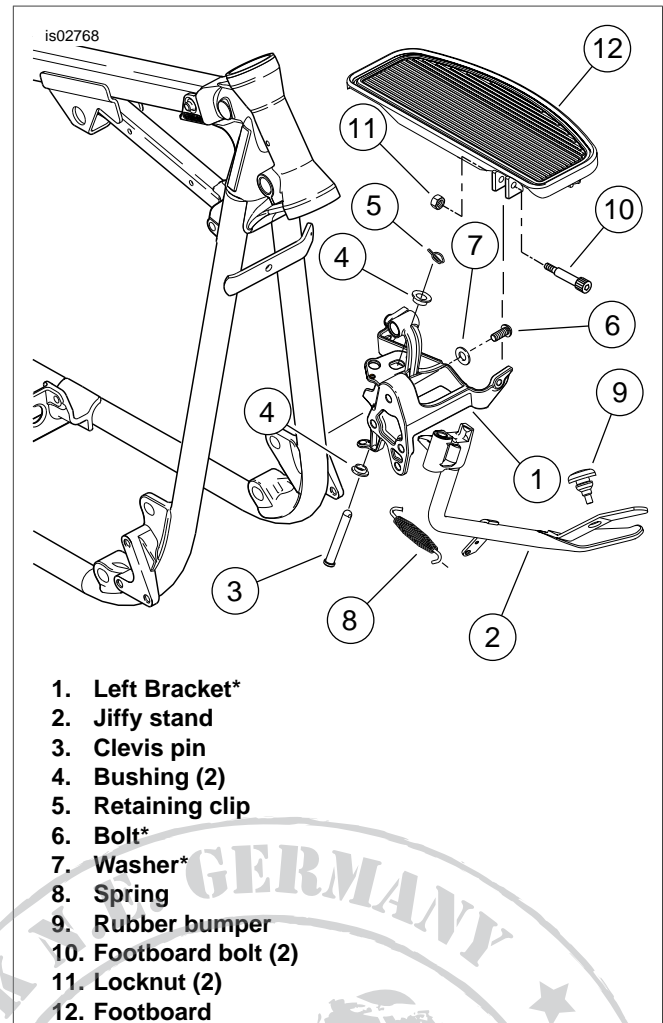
Left Side Footboard Mounting Bracket and Jiffy Stand Components
